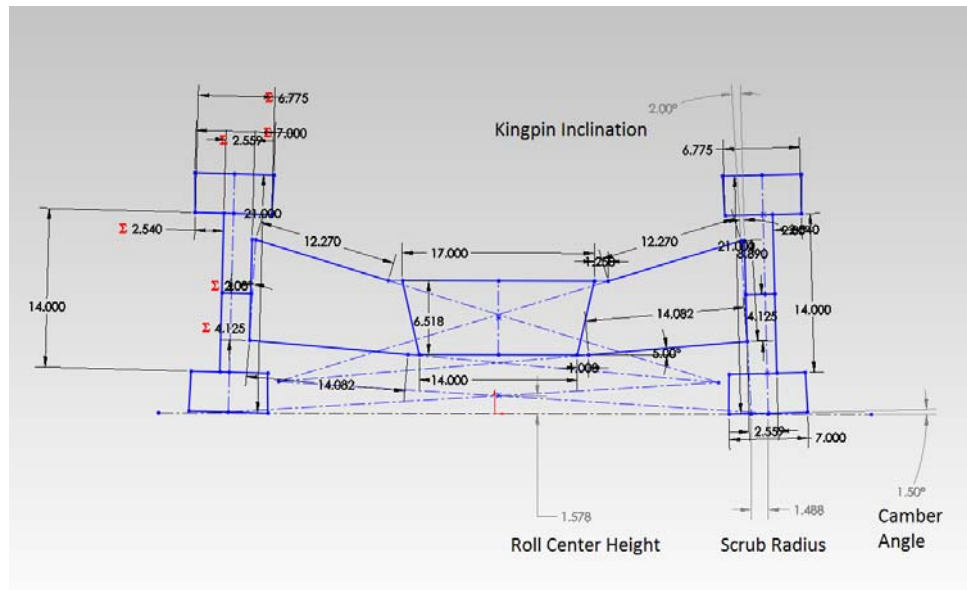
Front View 2D Sketch of Front Suspension Geometry
